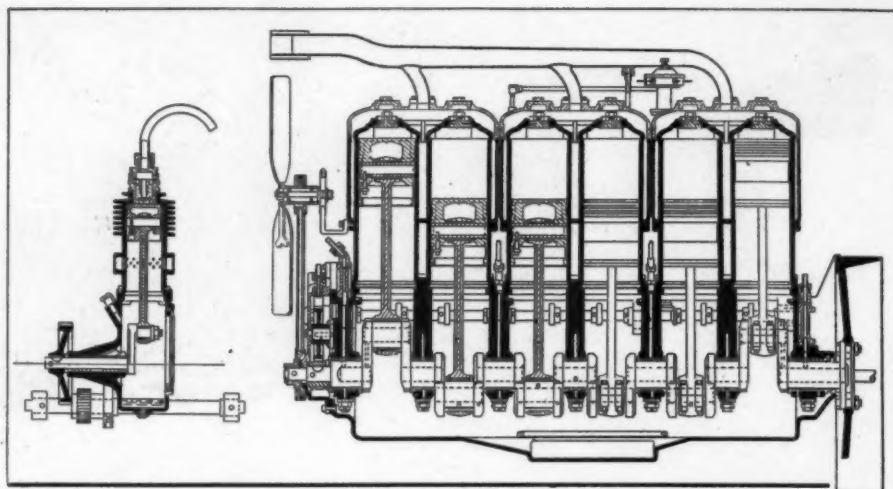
Lateral cross-section of a Pierce-Arrow motor with seven-bearing crankshaft and the section of the air pump for tire inflation
